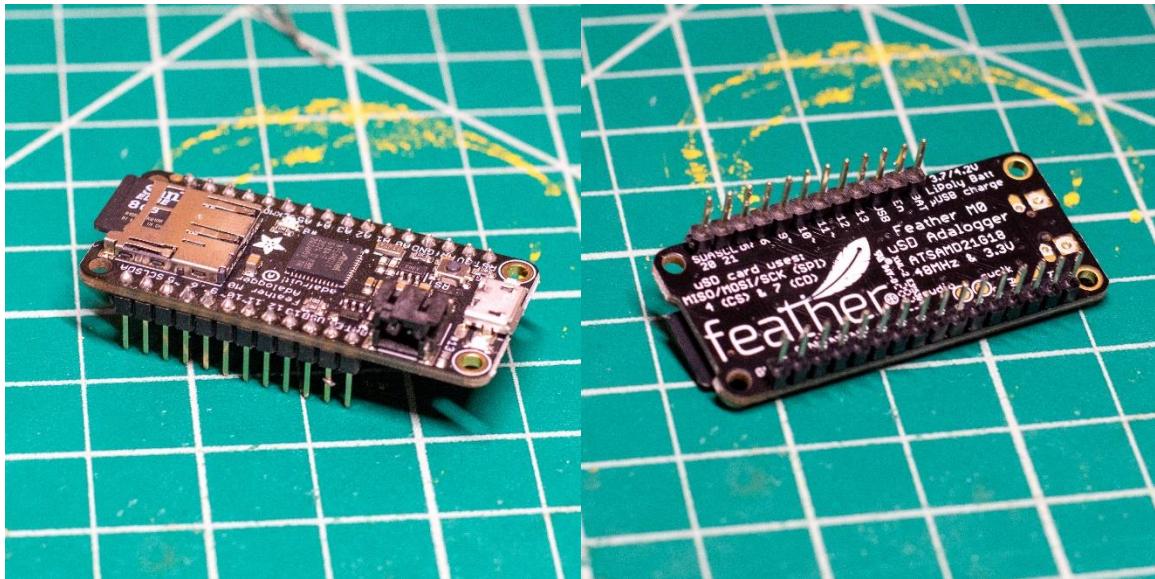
Adalogger M0 with male headers soldered to the pins. Top (left) and bottom (right)
